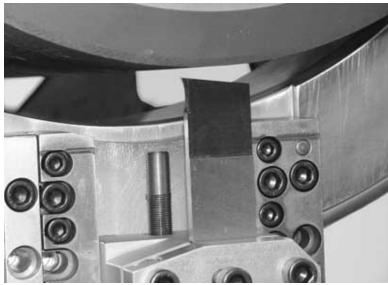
Set the tip of the parting tool 1/8" (3 mm) from the pipe surface.
